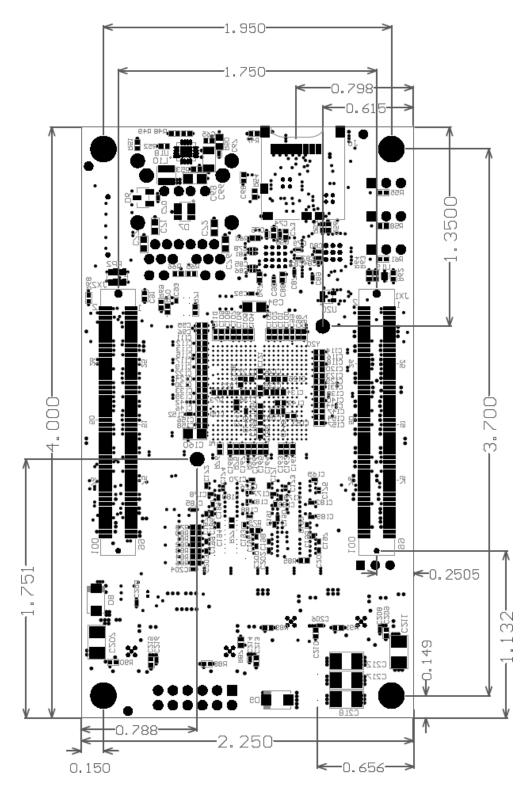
MicroZed Bottom-side Mechanical Dimensions (inches)
